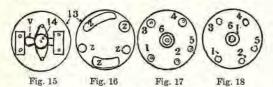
Front view of coil to which the switch is attached; (b) is the trembler or vibrator blade (26, Fig. 12); 14, the pressbutton contact.
